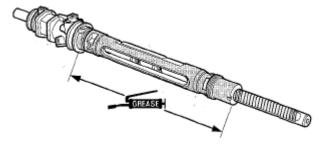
Coating Housing Surface With Multipurpose Grease Courtesy of AMERICAN HONDA MOTOR CO., INC.
